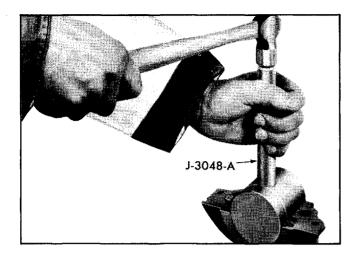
Compressing Upper Seal in Bearing Cap
